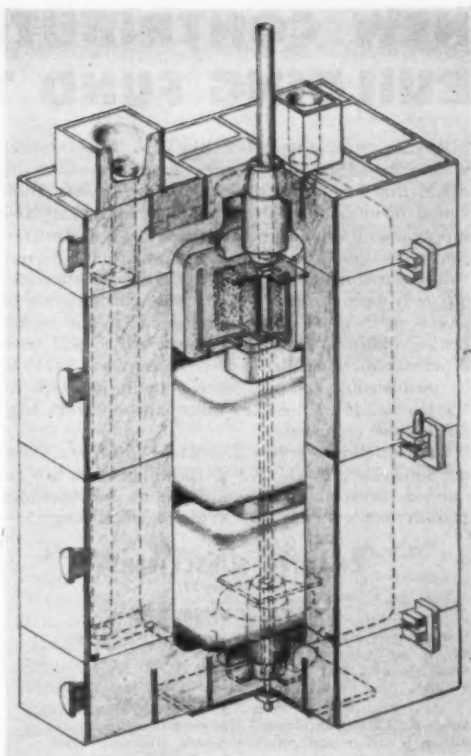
This section through the completed mold shows the packing plates built into the top and bottom body cores, the 2-in. perforated pipe through the top and bottom 4½-in. cores, and the bolt extending from the packing plate in the top body core through a plate below the bars of the drag. The cavity above the bolt head is filled with small coke and the bottom of the print for the 4½-in. core is remade, allowing for continuation of the vent, before setting the core and putting on the cope. The vent is carried through the cope by a pipe rising 6 to 12 in. above the pouring basin.
